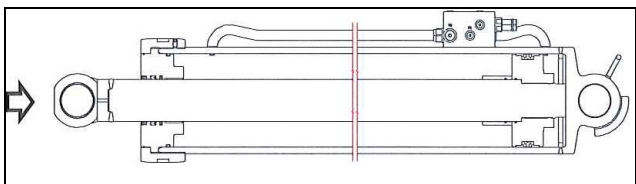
Rod Assembly Installation (Upright Level Cylinder)
